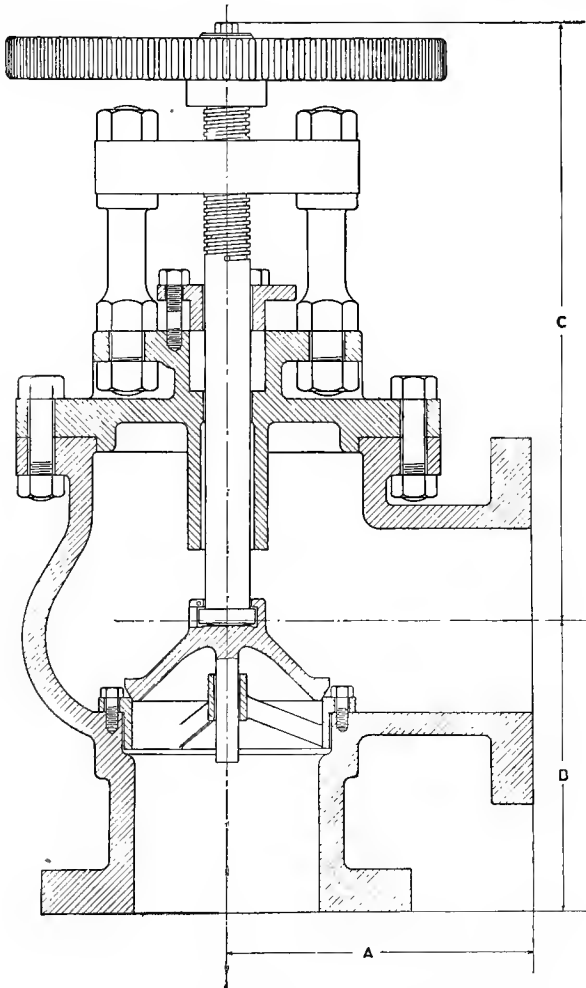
ANGLE STOP VALVE (TEMLER & RANOE).
